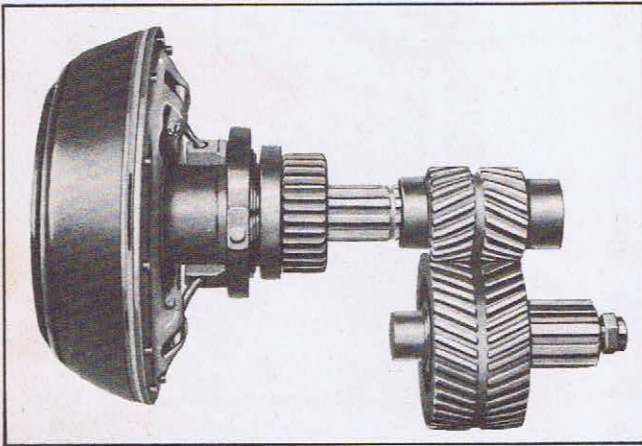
POWER FLOW FORWARD DRIVE OF TYPE "B" REVERSE GEAR.
